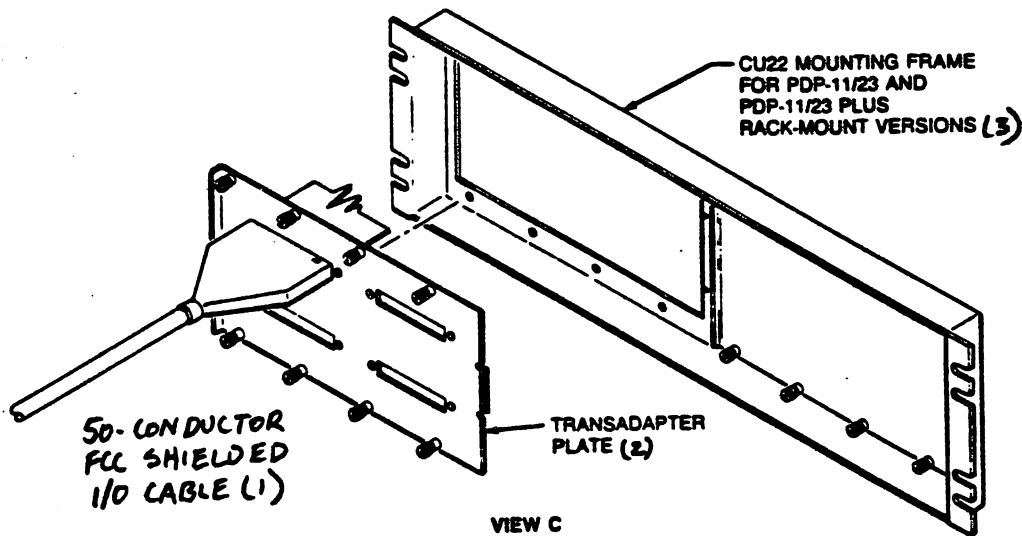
Installing the Universal Rack Mount Cabling Kit
